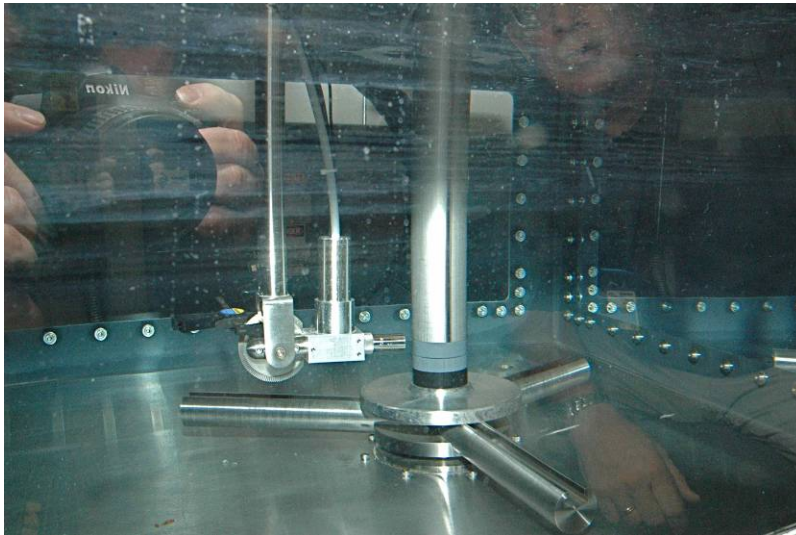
Photo of Haynes 230 seam welded tube in tank with ultrasonic transducer
